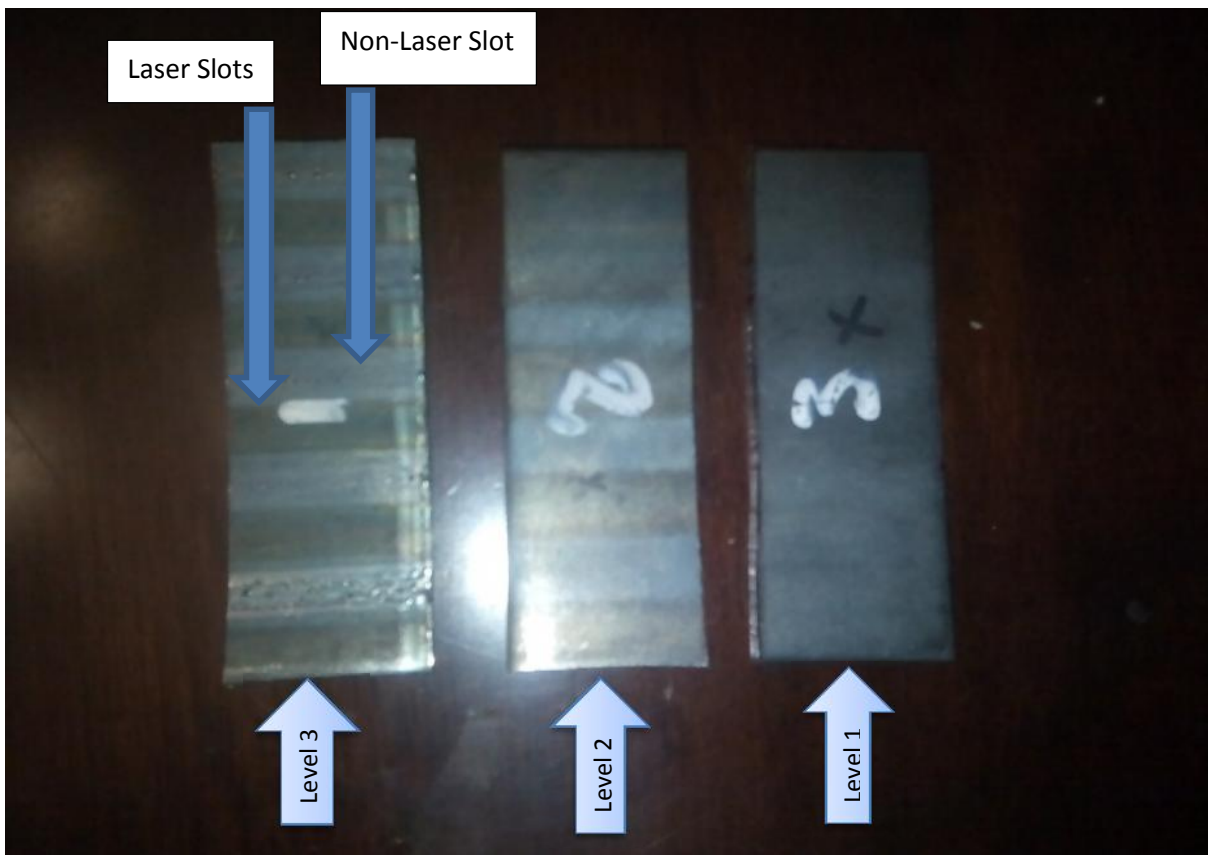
Smaller cut sample pieces (65 x 20 x 3 mm<sup>3</sup> AISI 1008 Mild Steel)
